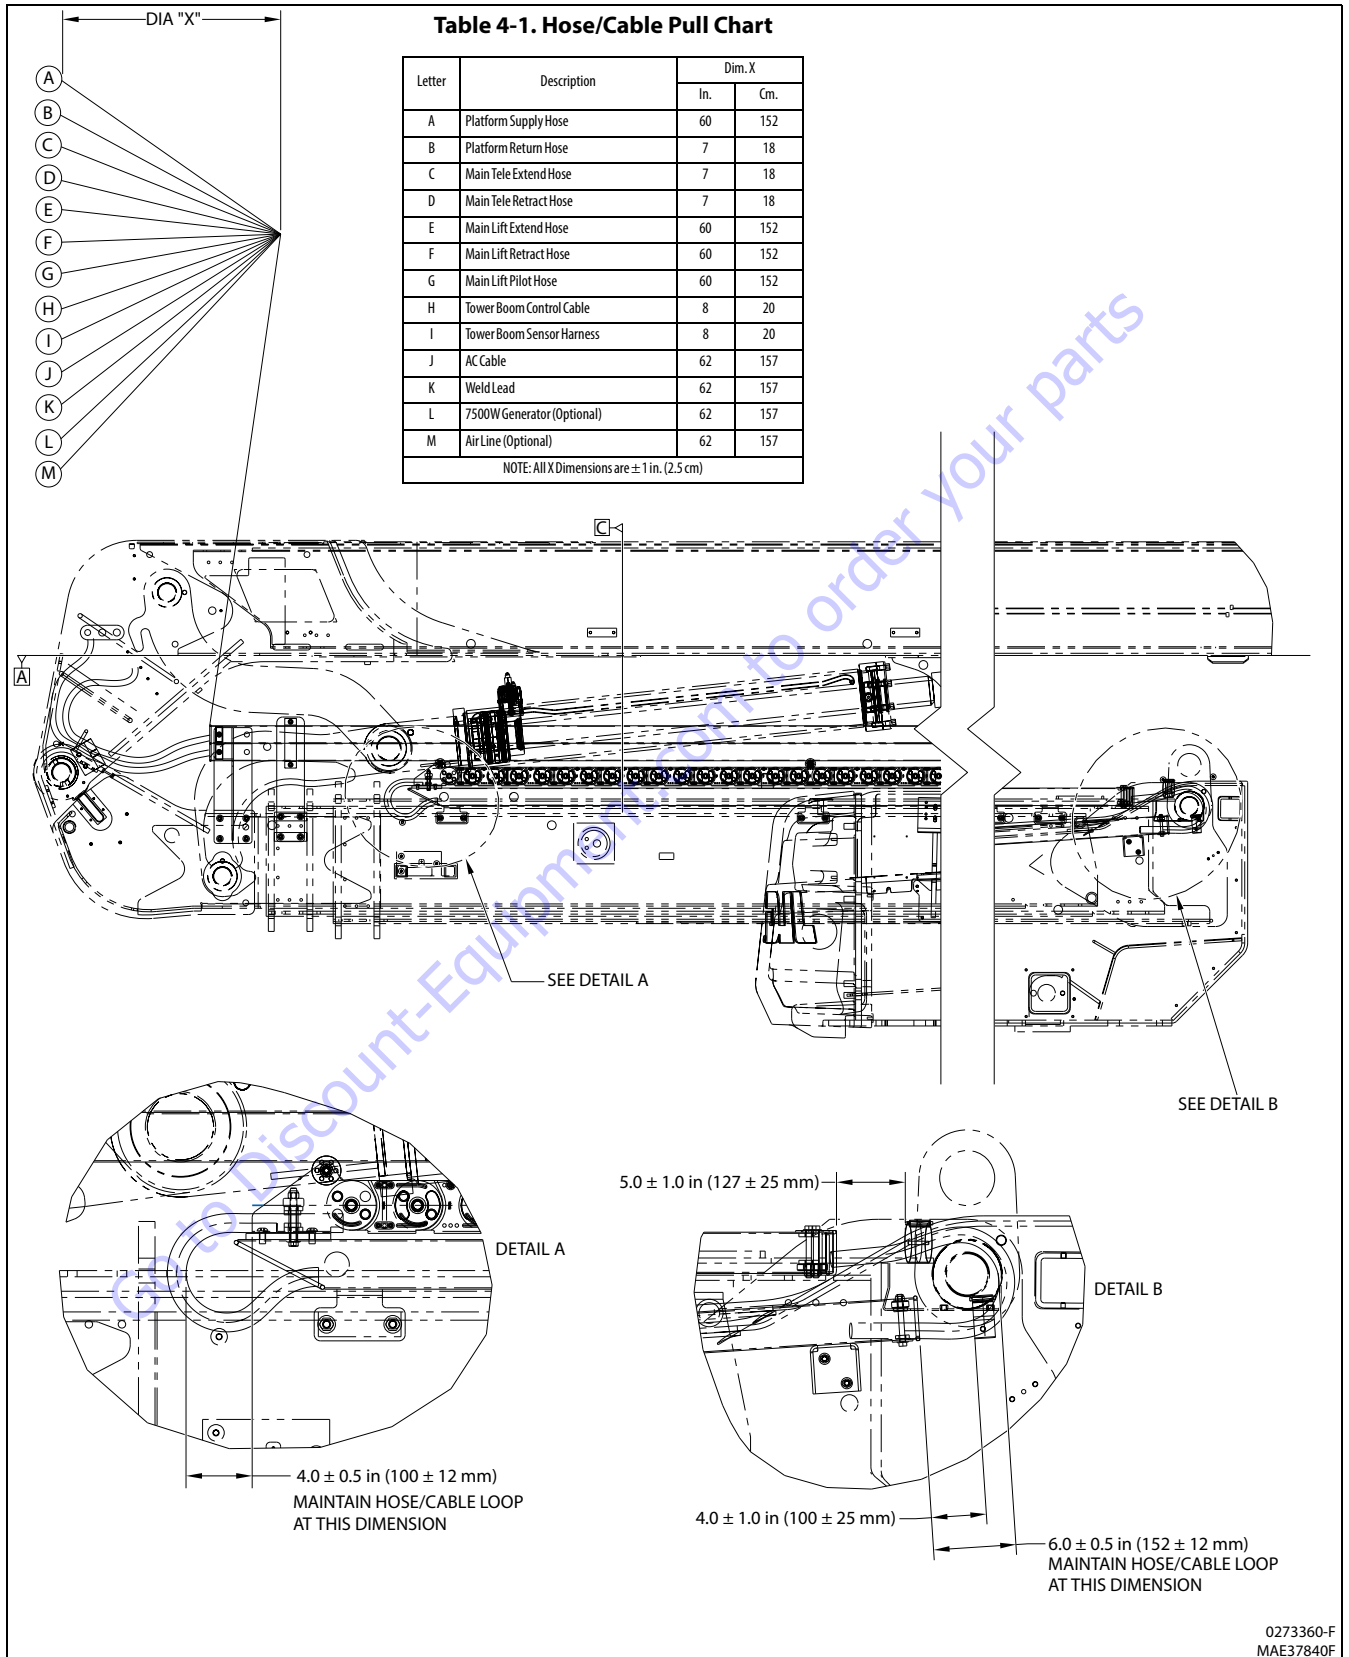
Tower Boom Powertrack Installation - Sheet 1 of 3
